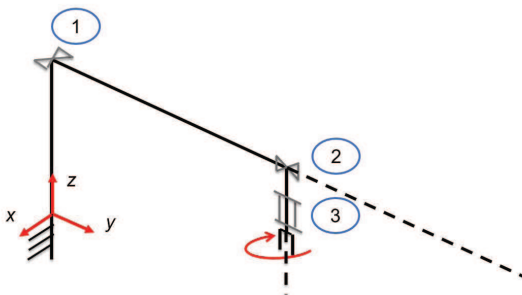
PPR arm representation of a gantry setup for a single screw driver with prismatic joints ① and ② and revolute joint ③.
